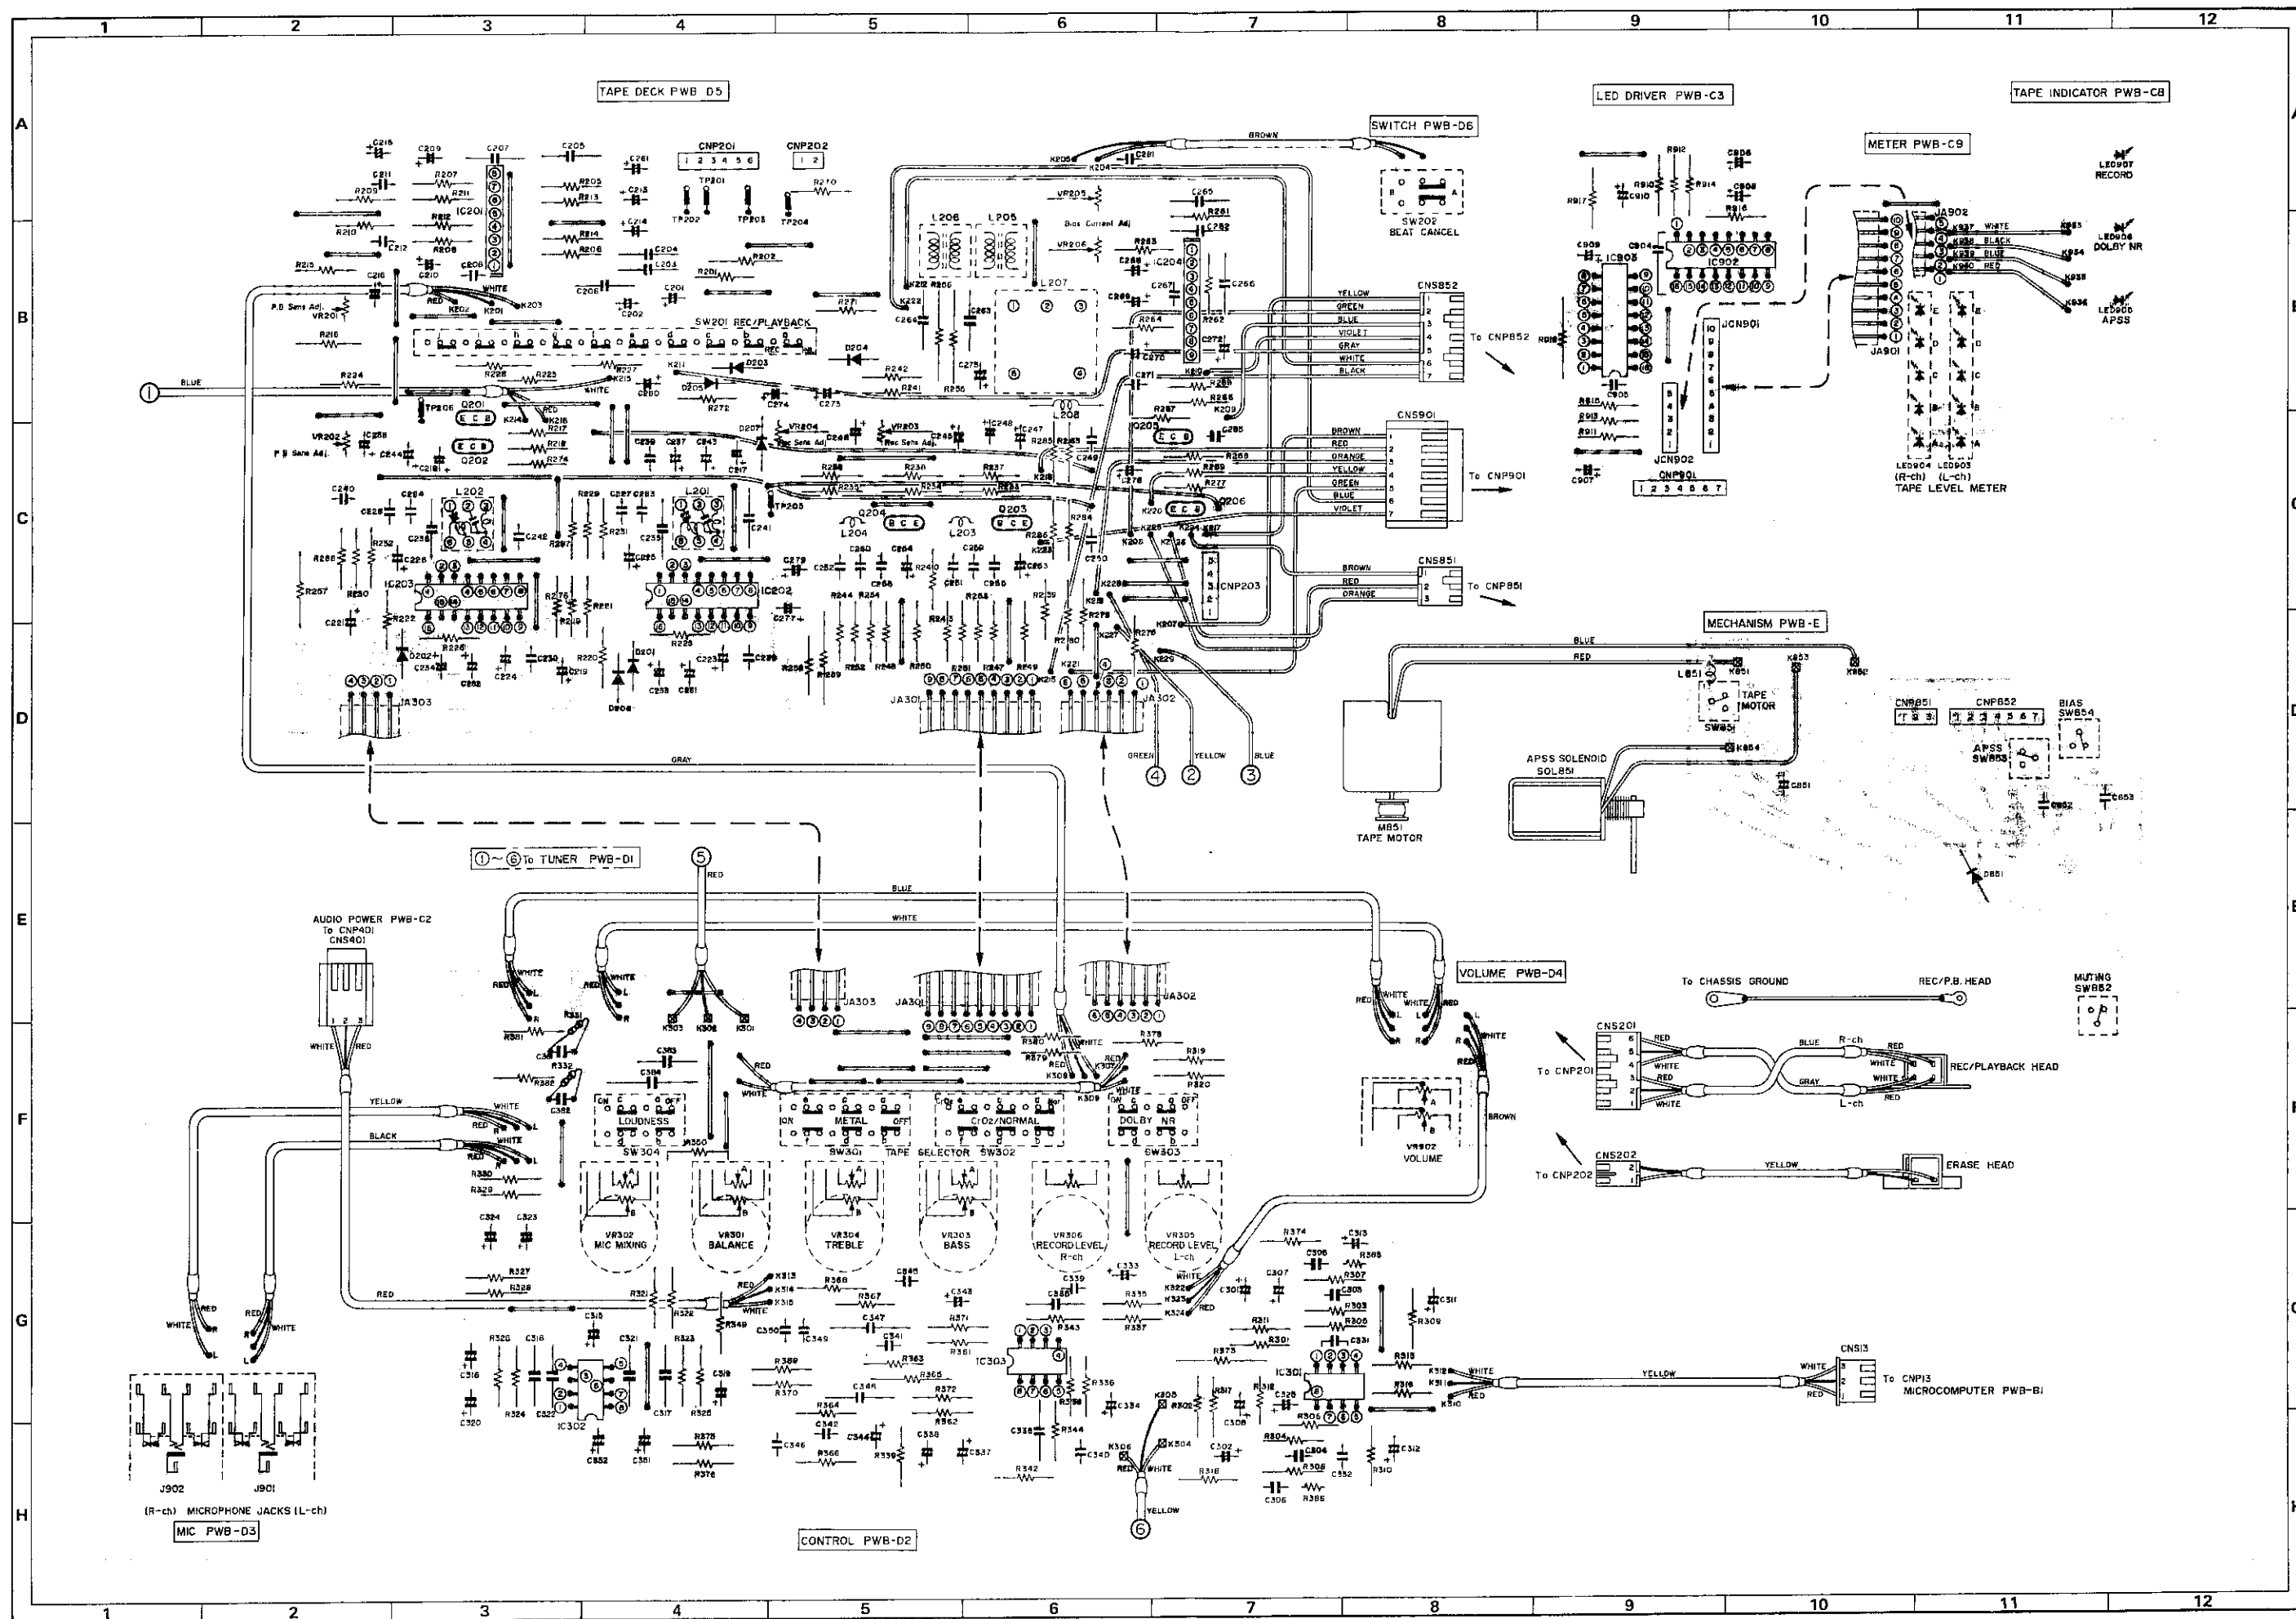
WIRING SIDE OF P.W. BOARD (1/3)
